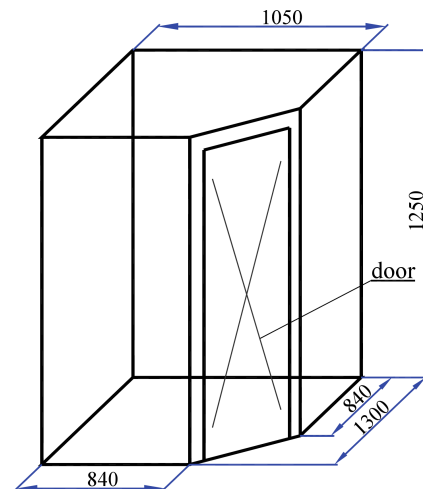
Schematic view of the operator's cab (internal dimensions).
